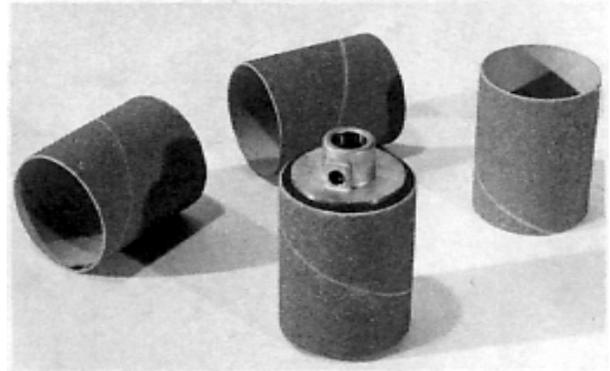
The drum sander is 2-1/4" in diameter and 3" long. It mounts on the Mark V main spindle or the belt sander auxiliary spindle.
